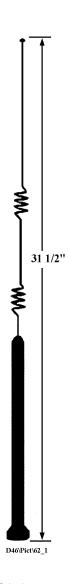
46-0062-001 Antenna dimensions (For Reference Only)
